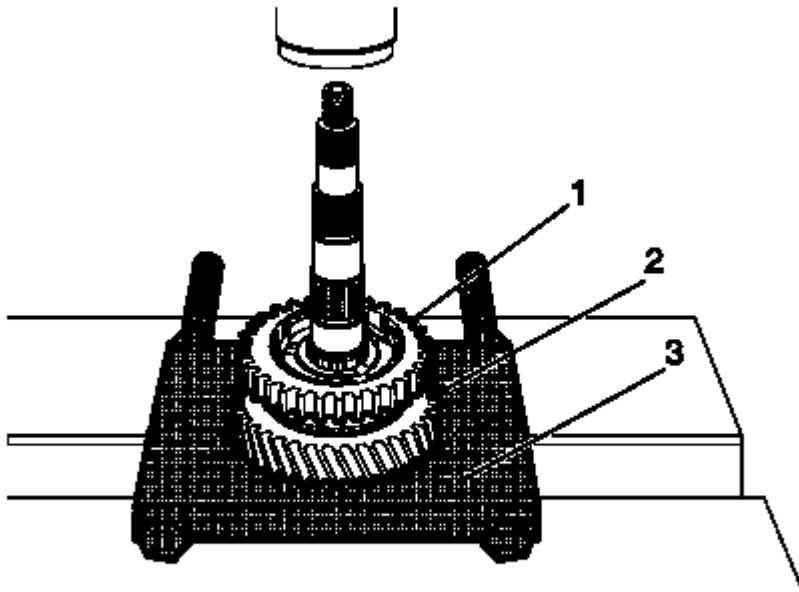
1st-2nd Gear Synchronizer Hub Assembly
